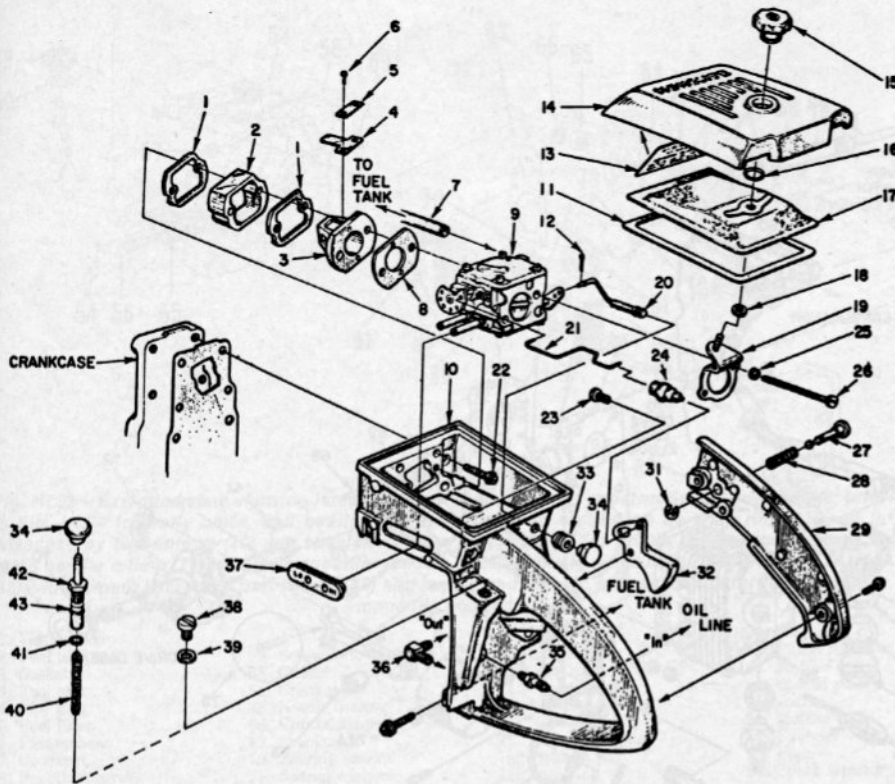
Exploded view of air box and throttle handle assembly for models equipped with pyramid reed type intake valve. Idle speed adjusting screw (23) on some models, is located in air box instead of on carburetor body; remove idle speed adjusting screw and spring from new service carburetor before installing carburetor on these models. Early type aluminum reed seat is shown; refer to Fig. HL32 for late type plastic (Delrin) seat and moulded reed retainer.
